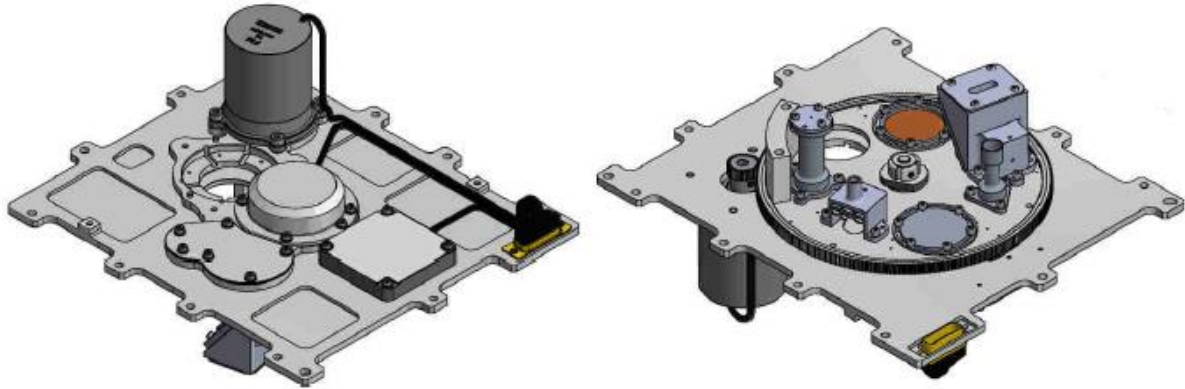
FCW CAD model (top view on the left, bottom view on the right)
